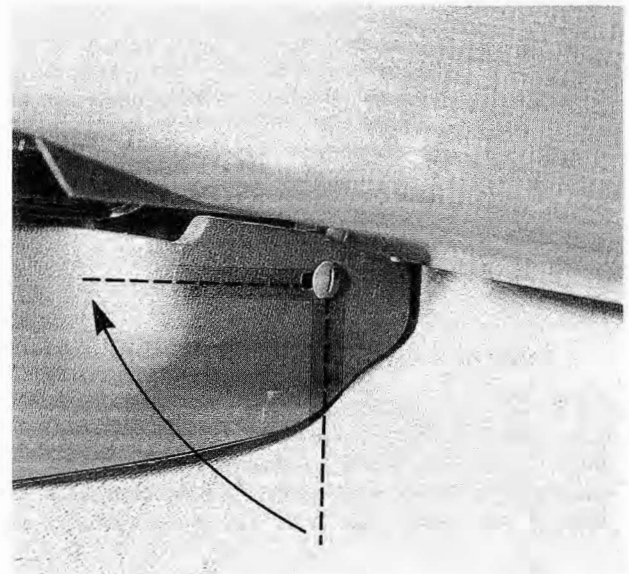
Console retainer. To unlock, turn 90° (¼ turn) counterclockwise. Remove retainers from both sides.
